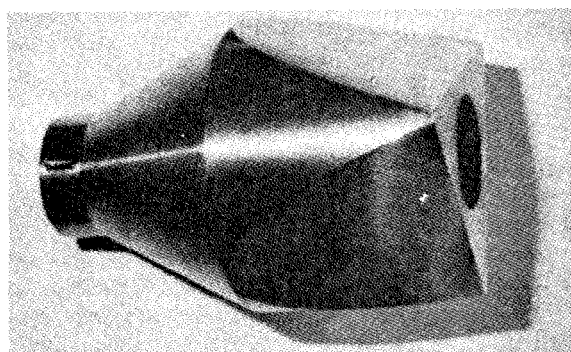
This is the horn used to weld the reflector shown in Fig 1.
